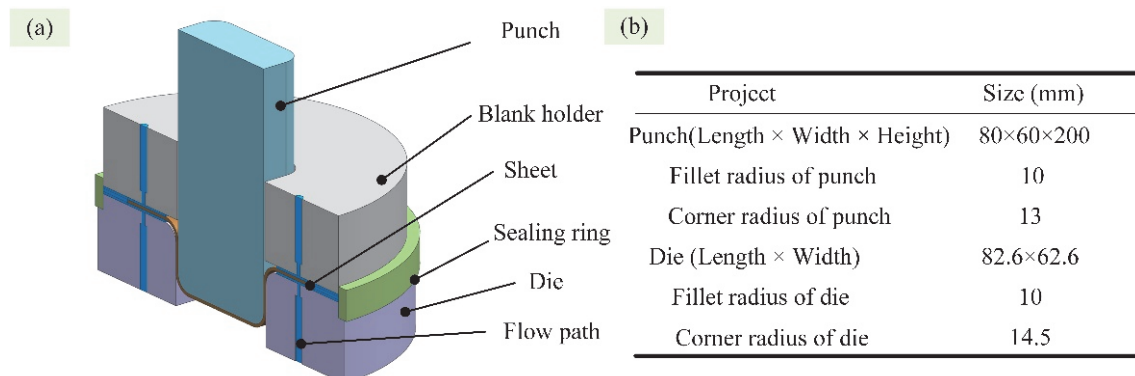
The dies for forced lubrication drawing (a) Schematic diagram of dies (b) Sizes
